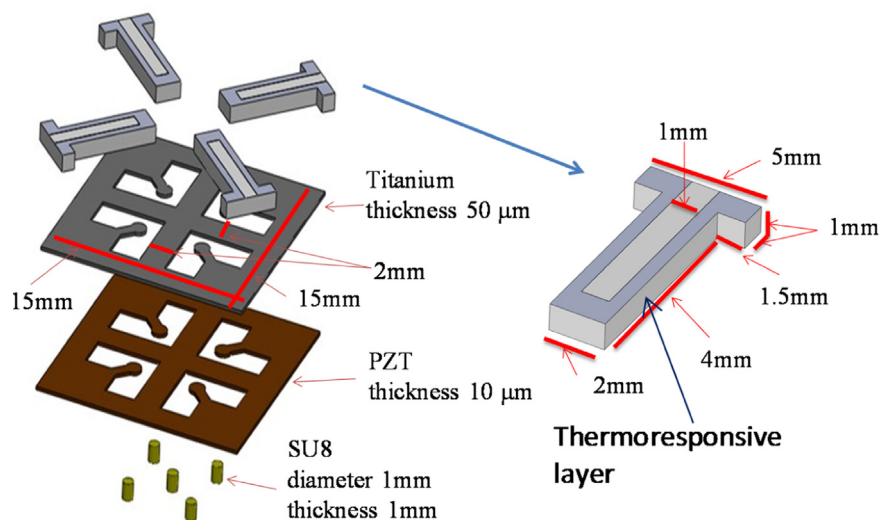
Configuration of proposed AE sensor array with exploded-view drawing.
